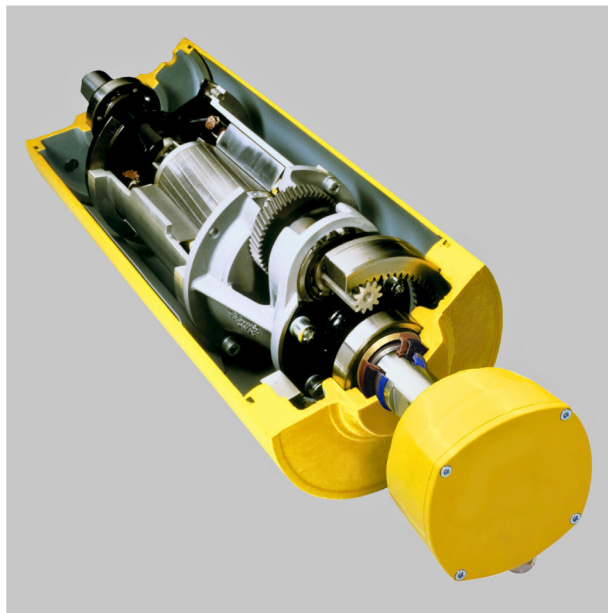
Motorized pulley with non-rotating drive train mounted on dead shaft within an oil-filled shell.
